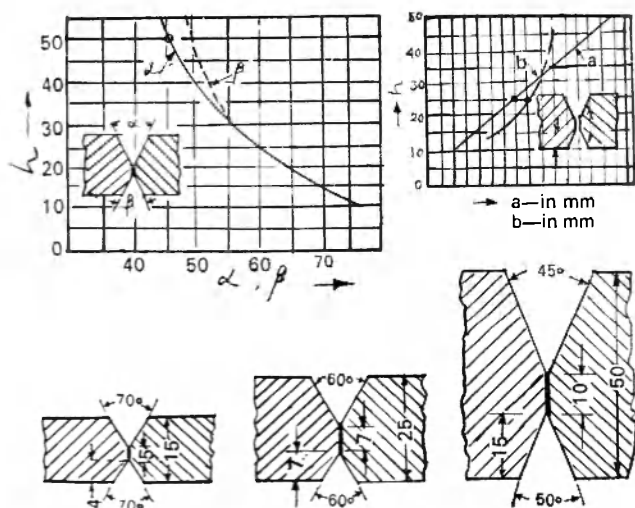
X joint details for welding from both sides [Extracted from 'Symposium in welding' part II, 1953 (Czechoslovak)].
